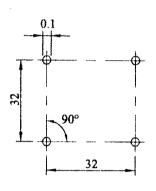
Tolerance diagram for the axis of the holes at maximum material size
